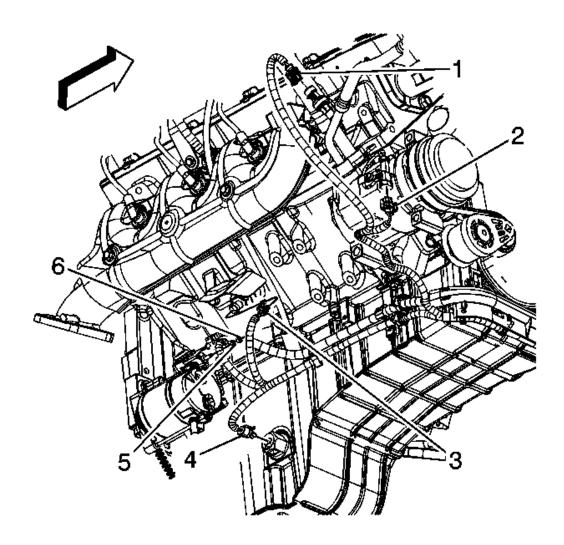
View Of Oil Level Sensor Electrical Connector Courtesy of GENERAL MOTORS CORP.
